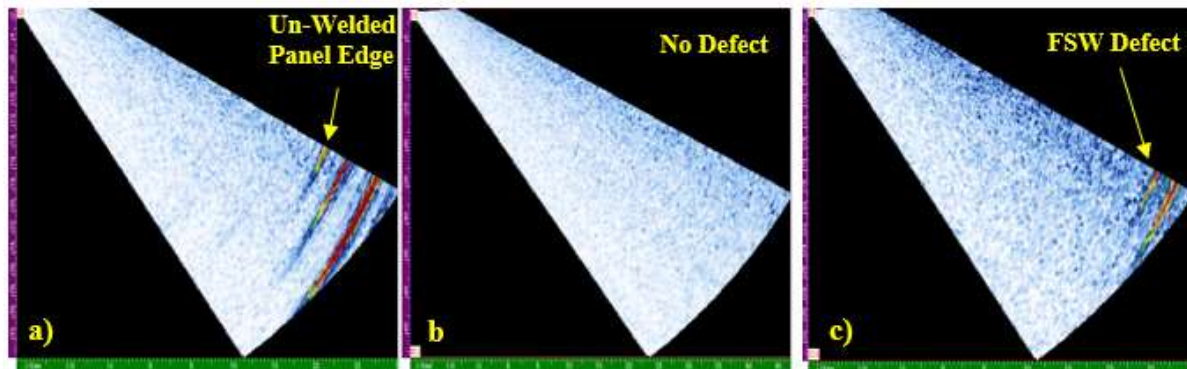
PAUT S-scan images of HT wedge/transducer unit signals: a) un-welded seam, b) nominal welded seam, c) TR defect welded seam.
